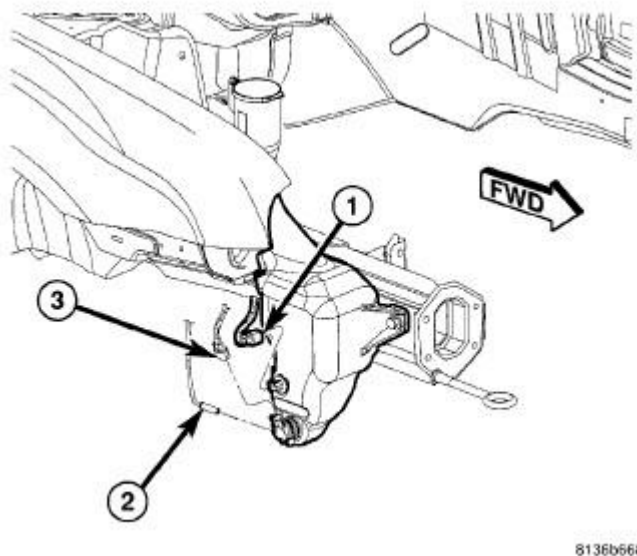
Identifying Wiper Hose, Reservoir Pump & Washer Fluid Level Sensor
